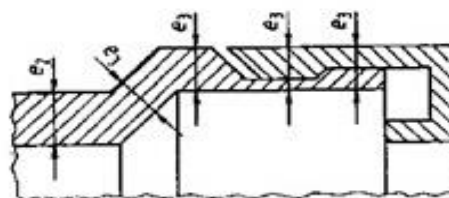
EXAMPLE FOR CALCULATION OF THE WALL THICKNESS OF SOCKETS WITH RETAINING CAP
